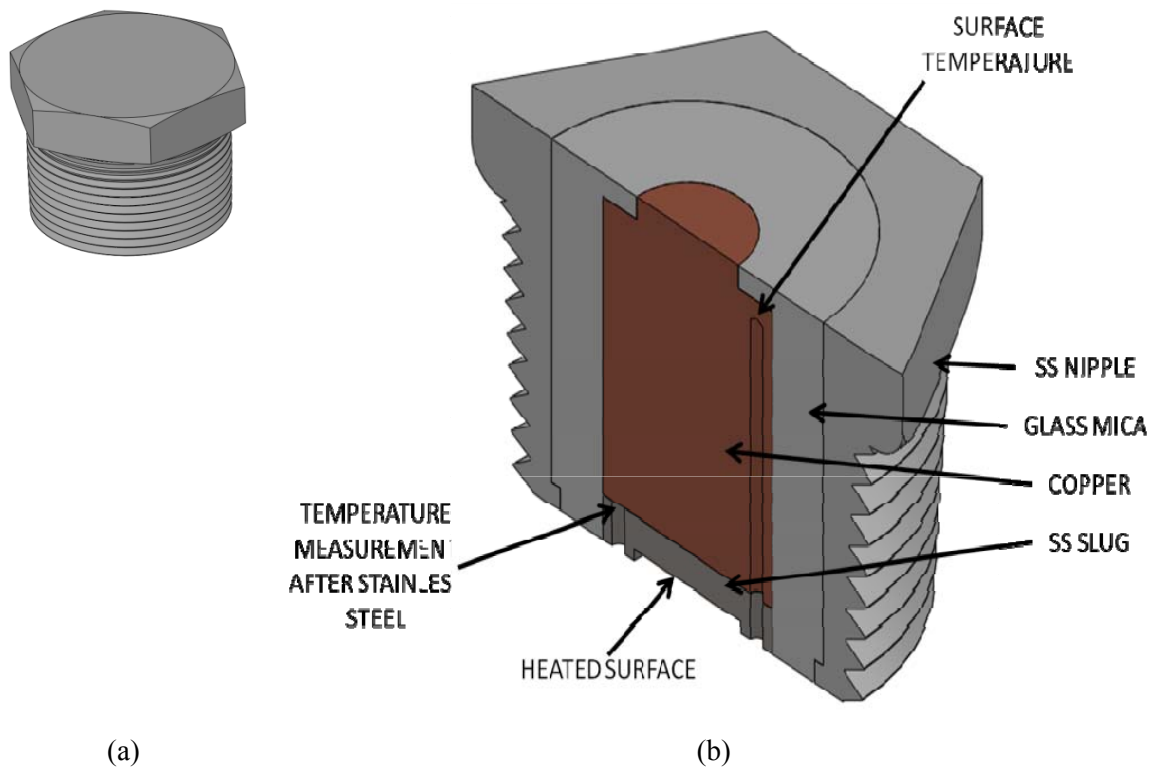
(a) Hollow stainless steel plug, (b) Section view of the extension block shown in (a)
